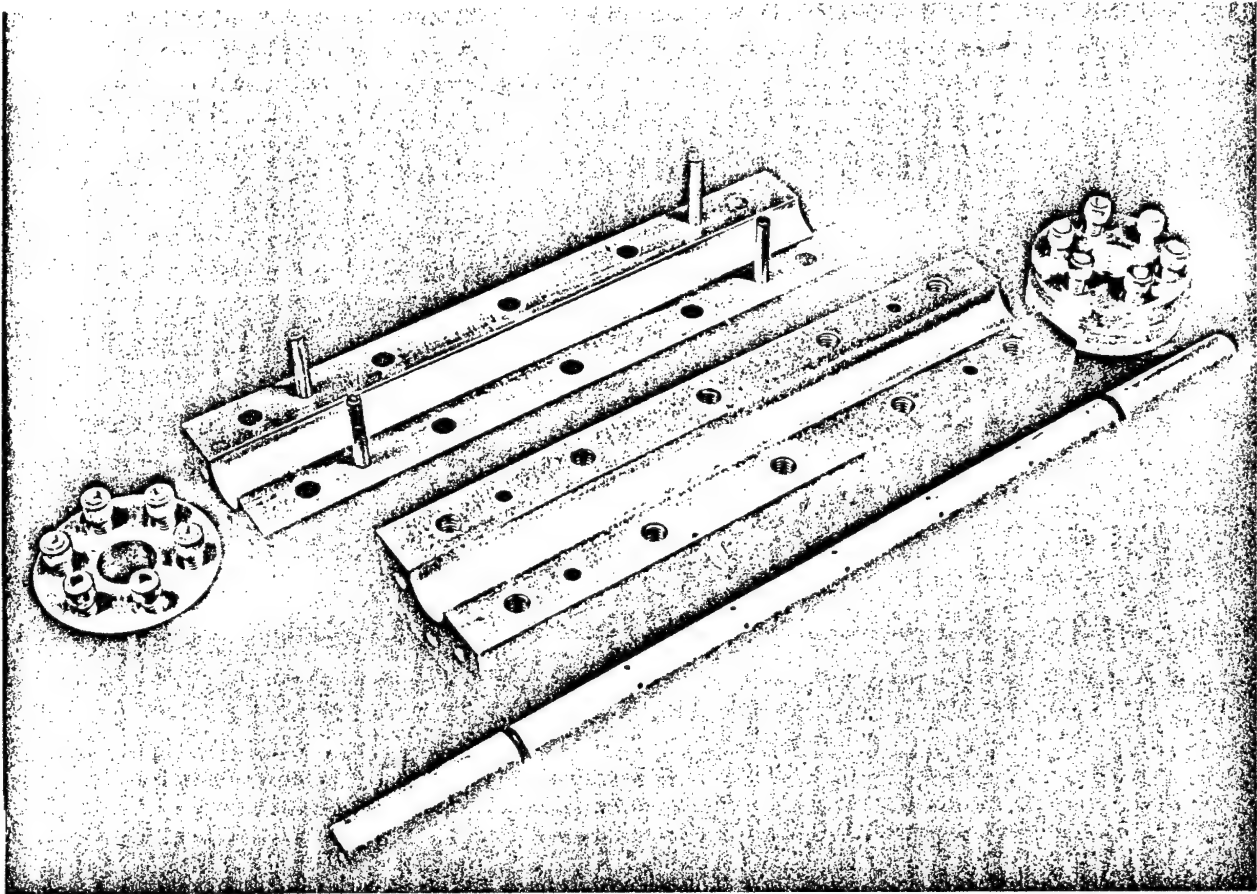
GAGED TUBE SPECIMEN (1/4 INCH, 350Ω GAGES)
